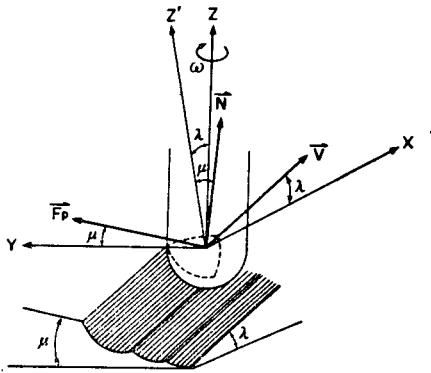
Three-dimensional surface cutting process model of ball end mill
